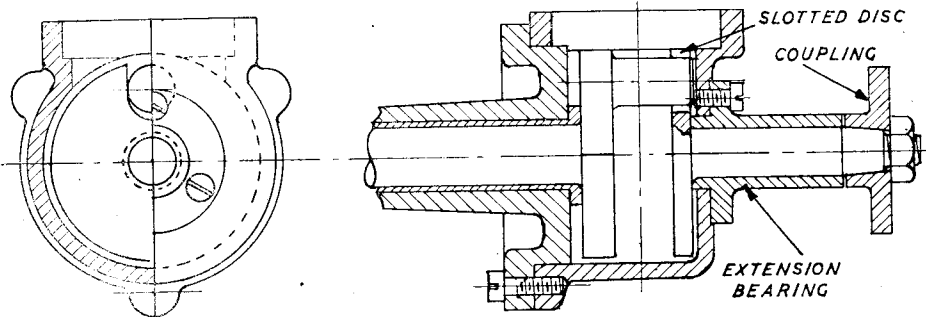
Extension bearing fitted to take auxiliary or "follower" shaft
